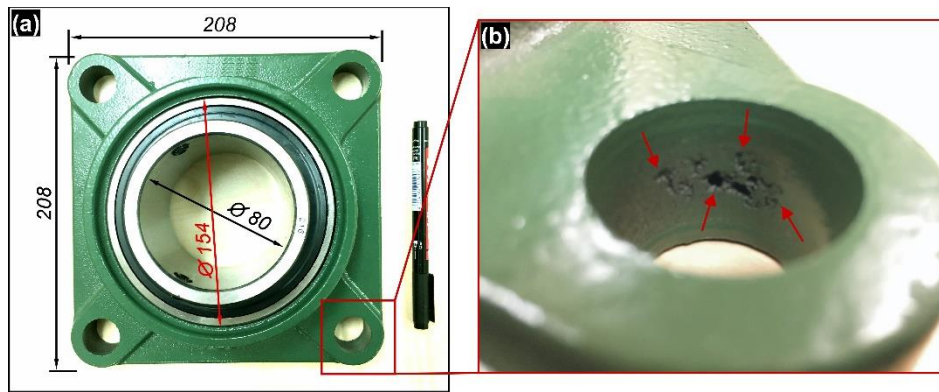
(a) photograph of a new and unused UCF-216, and (b) casting defects (porosities) on the inner surface of the bolt hole of this UCF-216.
